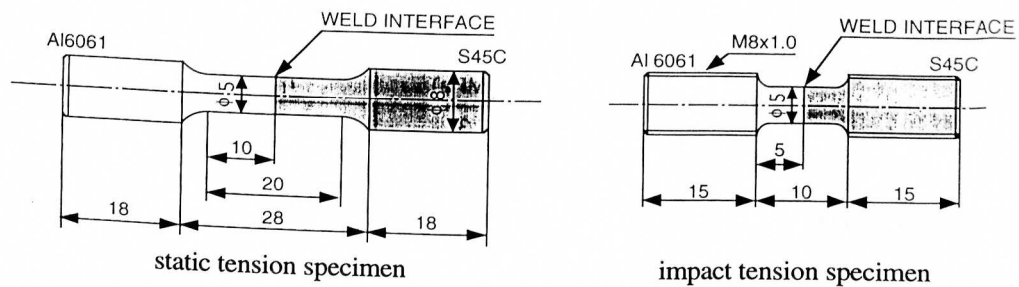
Dimensions of static and impact tension specimens from friction welded joints
